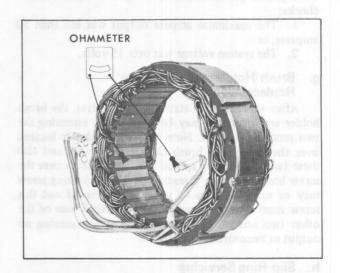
Checking Stator (With Heavy Duty Generator)
